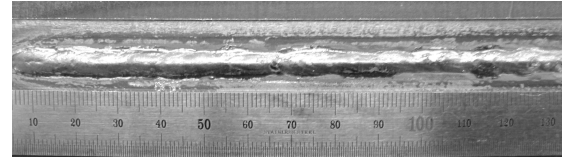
Back bead appearance of weld by optimal welding condition
